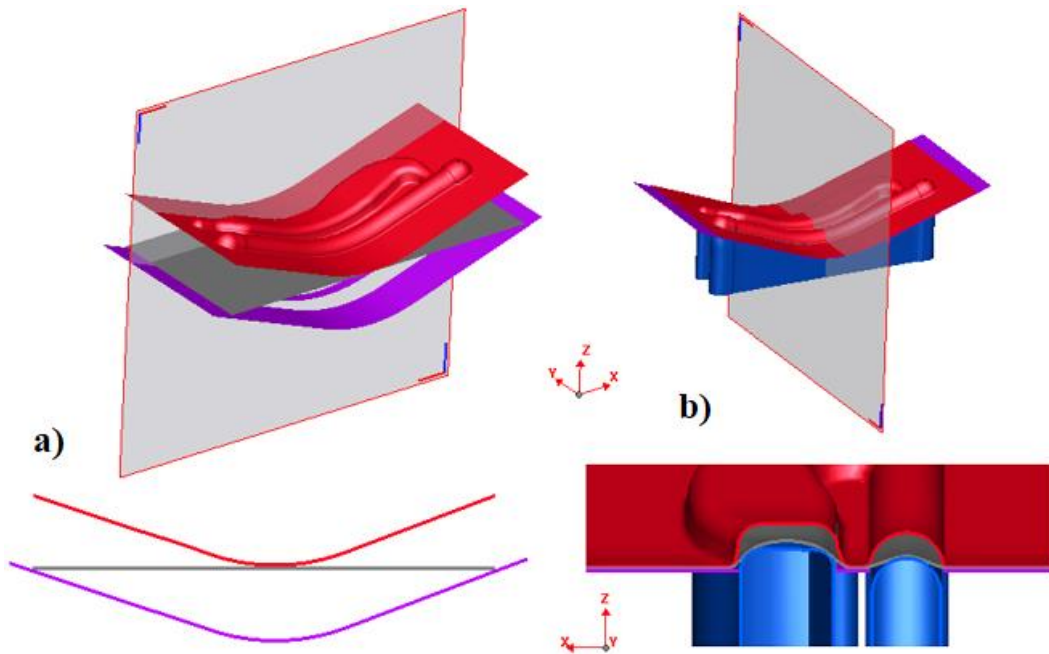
Presentation of the virtual stamping process in 2 forming operations. a) Closing of the tool pair Die/Blank-Holder to bend the Blank. b) Deep-drawing of the concave shell.
